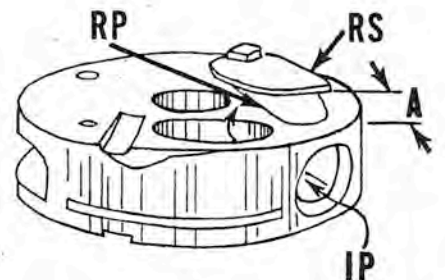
Center main bearing showing inlet reed valves. Adjustment (A) of reed stop (RS) is 7/64 inch.
